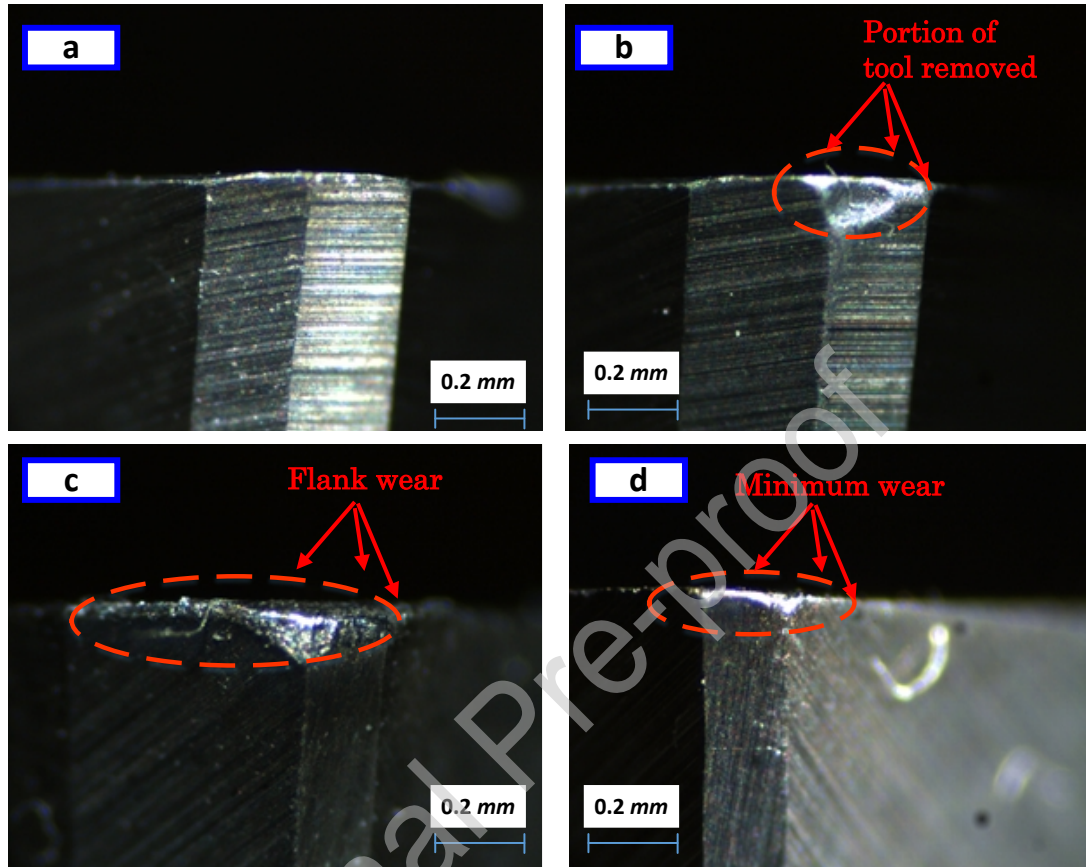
Wear at flank side of cutting tool at ($f = 0.1 \frac{mm}{rev}$; $v_c = 90 \frac{m}{min}$; $n_p = 0.7$; $a_p = 0.5 mm$) (a) New tool (b) MQL (c) NFMQL (d) HNFMQML
